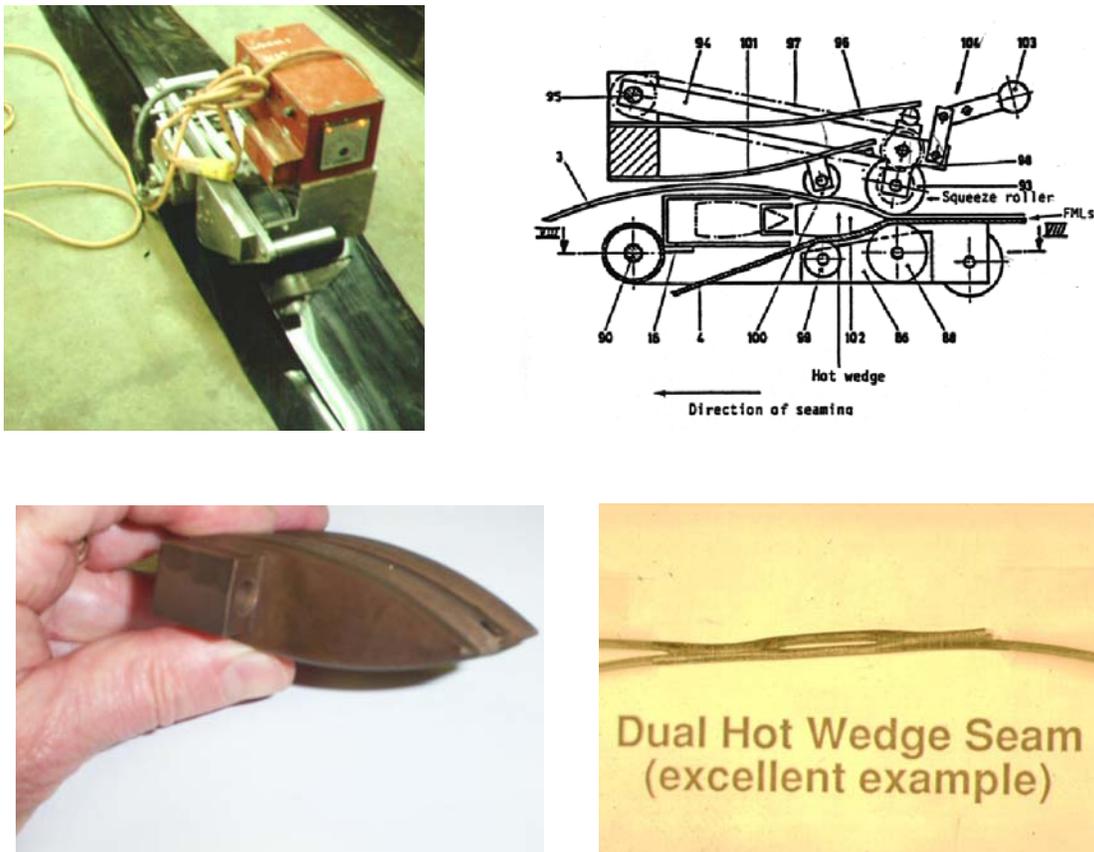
Photographs of Wedge Welding Device, Dual Track Wedge and Cross Section of Subsequent Seam
